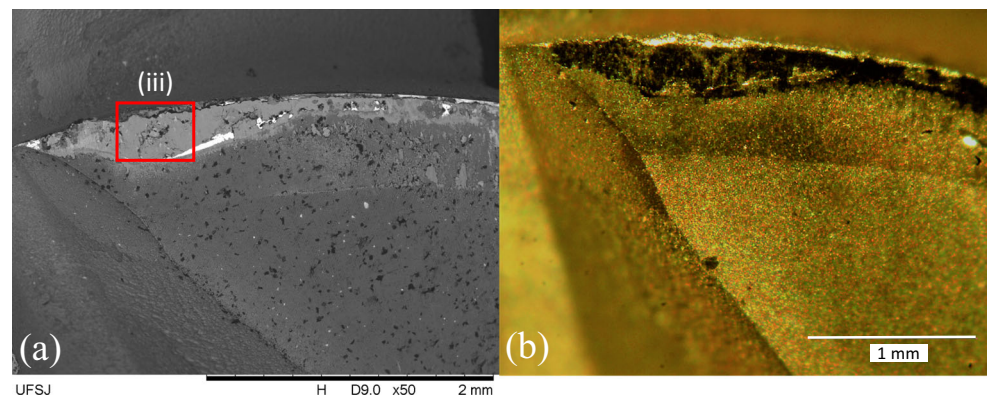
presents images obtained by SEM, Fig. 11a, and by the optical microscope, Fig. 11b, of the flank wear of the frontal cutting edges for $v_c = 60$ m/min. It can be observed that the tool wear was regular in the flank face
